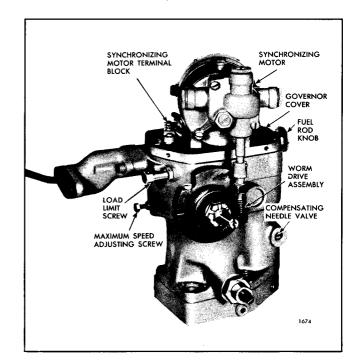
Typical Synchronizing Motor Mounting and Drive Assembly
